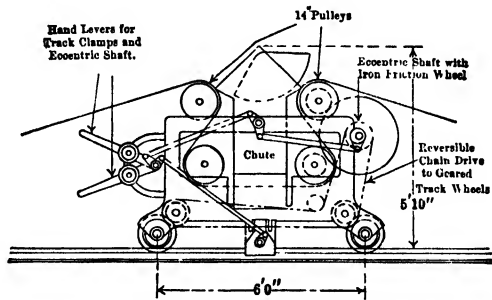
Four-pulley Tripper for Reversible High-speed Grain Conveyor.
